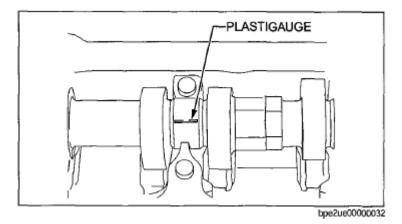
Measuring Camshaft Journal Oil Clearance Using Plastigauge
